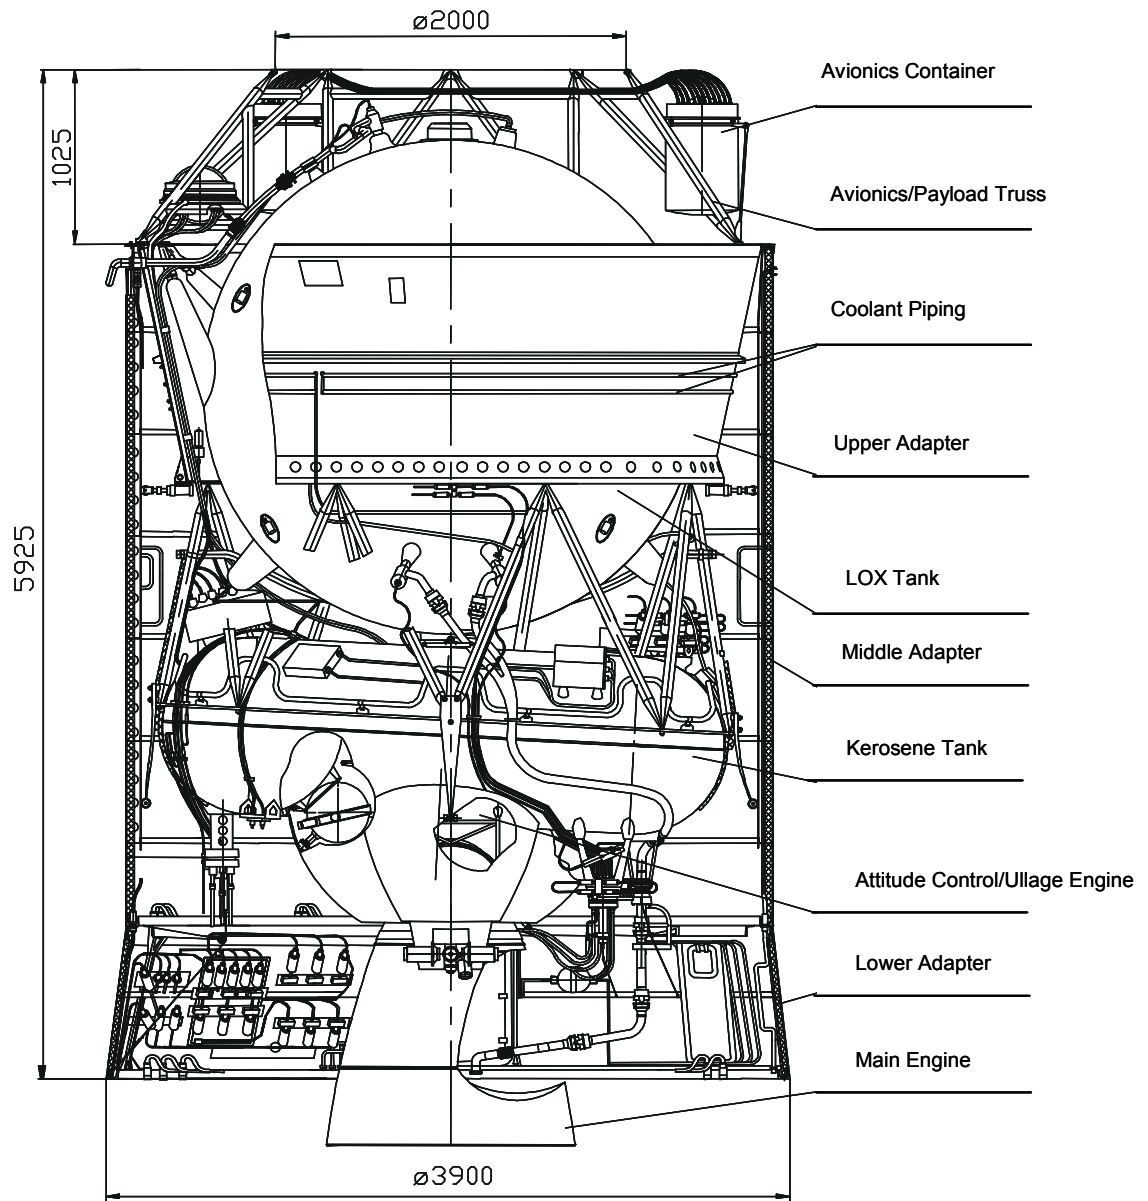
Block DM-SLB (dimensions in millimeters)
